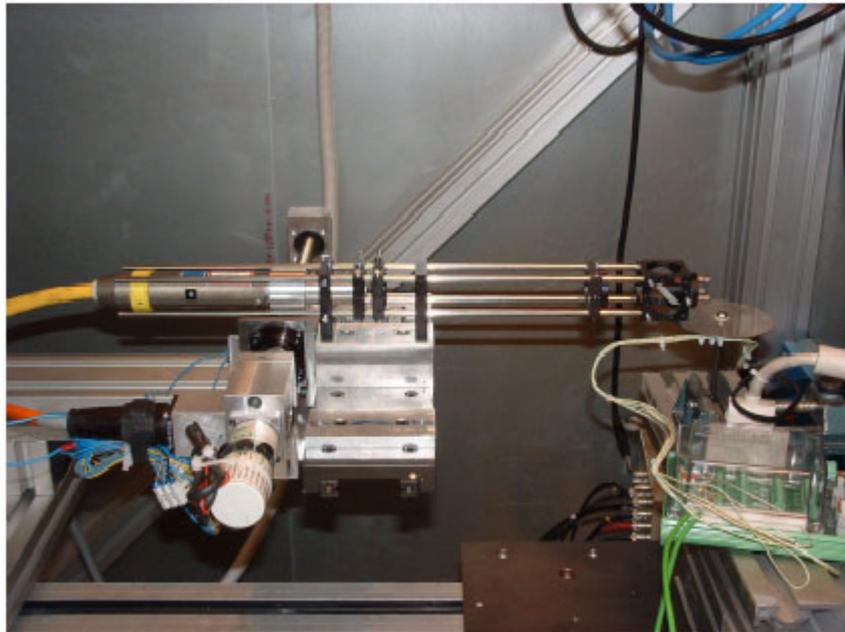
Laser finger for the heating of a work piece already situated between the drawing tools [12]
